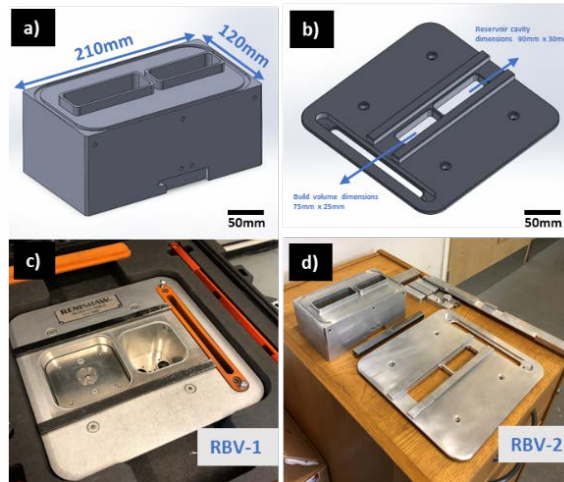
Design and fabrication of the RBV kit for the in-house LPBF system: a) Build block, b) Top plate, c) Existing RBV kit (80 mm × 80 mm), d) Newly fabricated RBV kit (25 mm × 75 mm).
